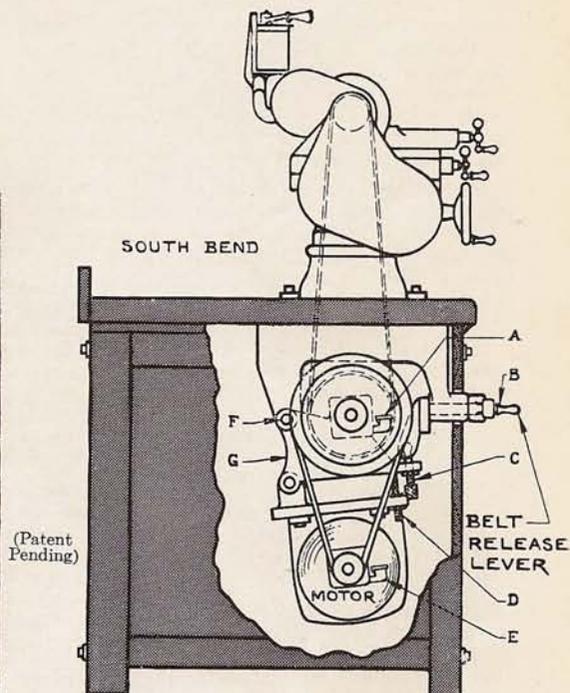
Cross Section End View of Underneath Belt Motor Driven Bench Lathe.
